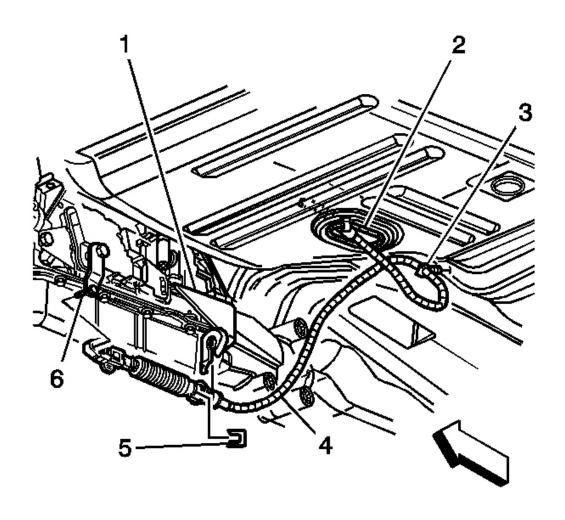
Identifying Range Selector Cable & Components Courtesy of GENERAL MOTORS CORP.
